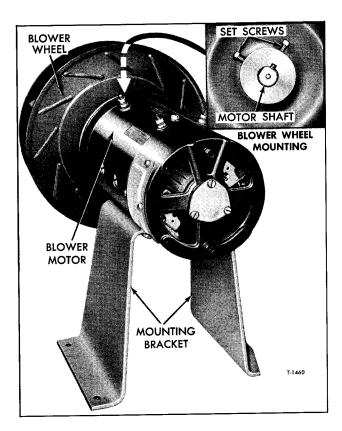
Blower Motor with Blower Wheel and Mounting Bracket Installed
